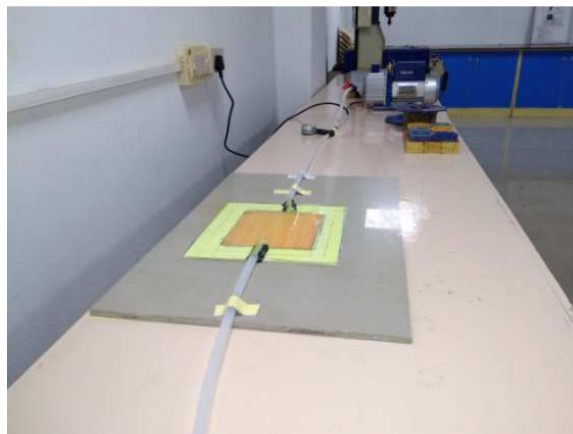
Vacuum Assisted Resin Transfer Molding Setup
